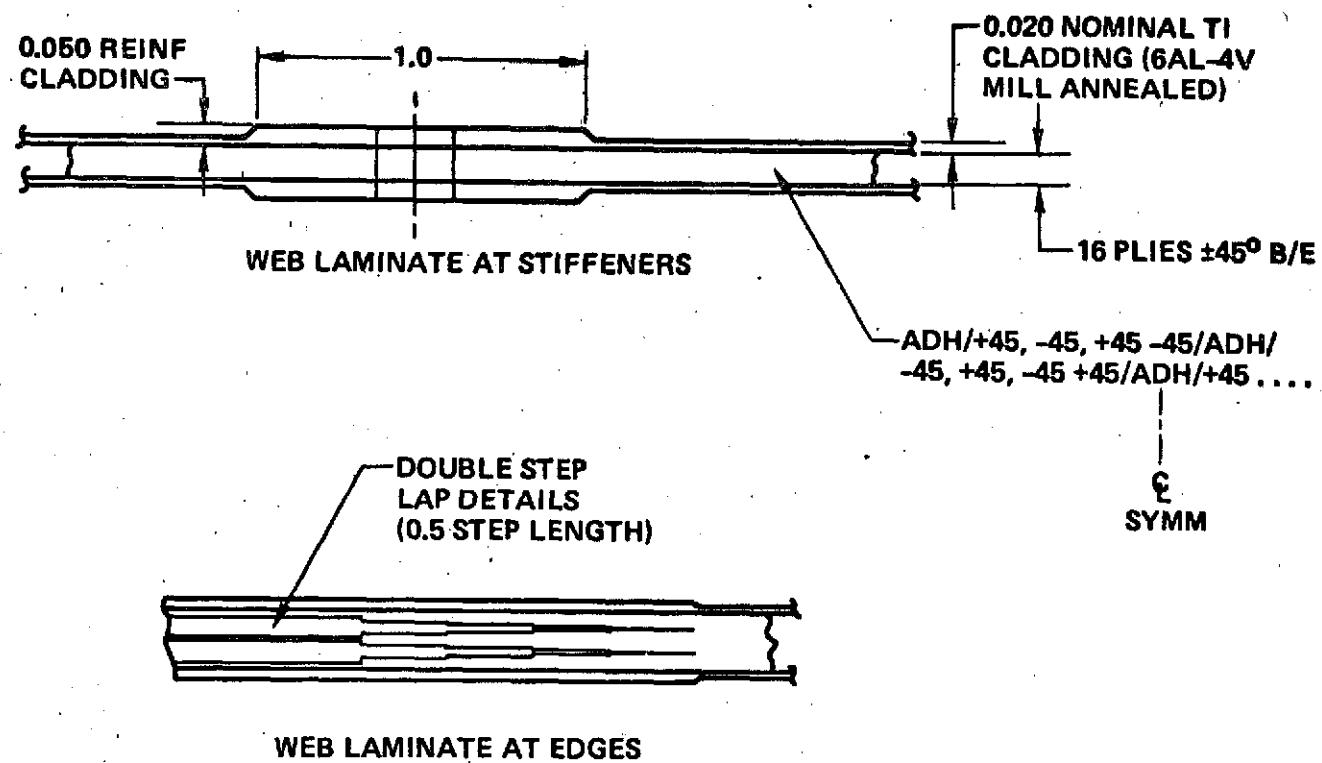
B/E REINFORCED SHEAR WEB DESIGN DETAILS
